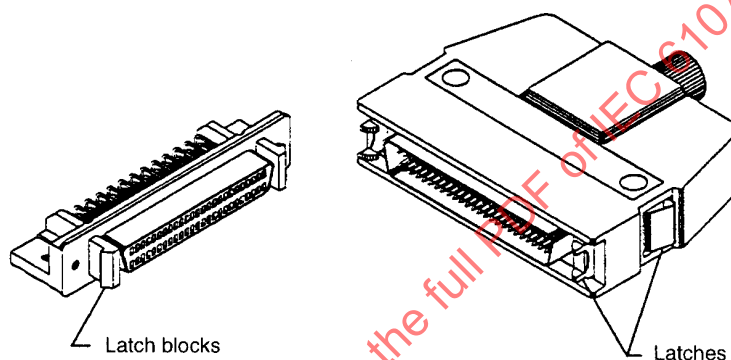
Right-angle fixed connector with female contacts and latch blocks
